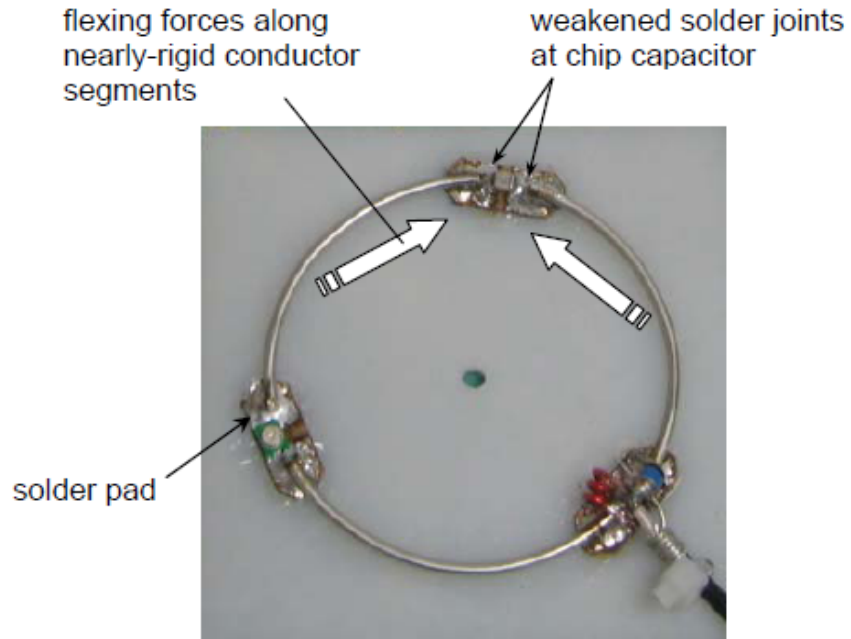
Typical coil element failure occurs at solder joints between chip capacitor and coil conductor segments.
